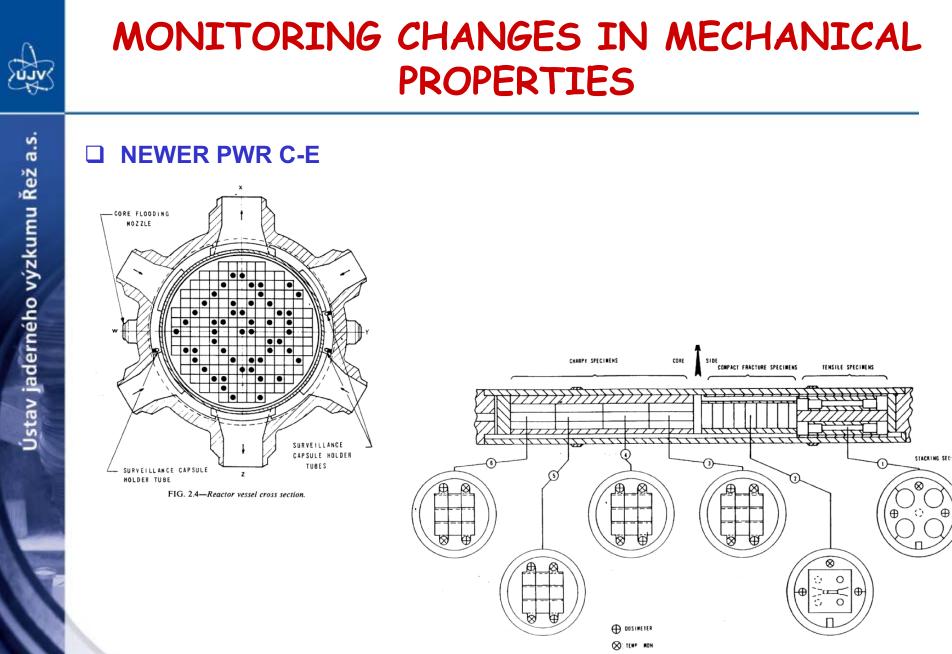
Typical loading diagram for test specimens in surveillance capsule containing compact and fracture specimens.
